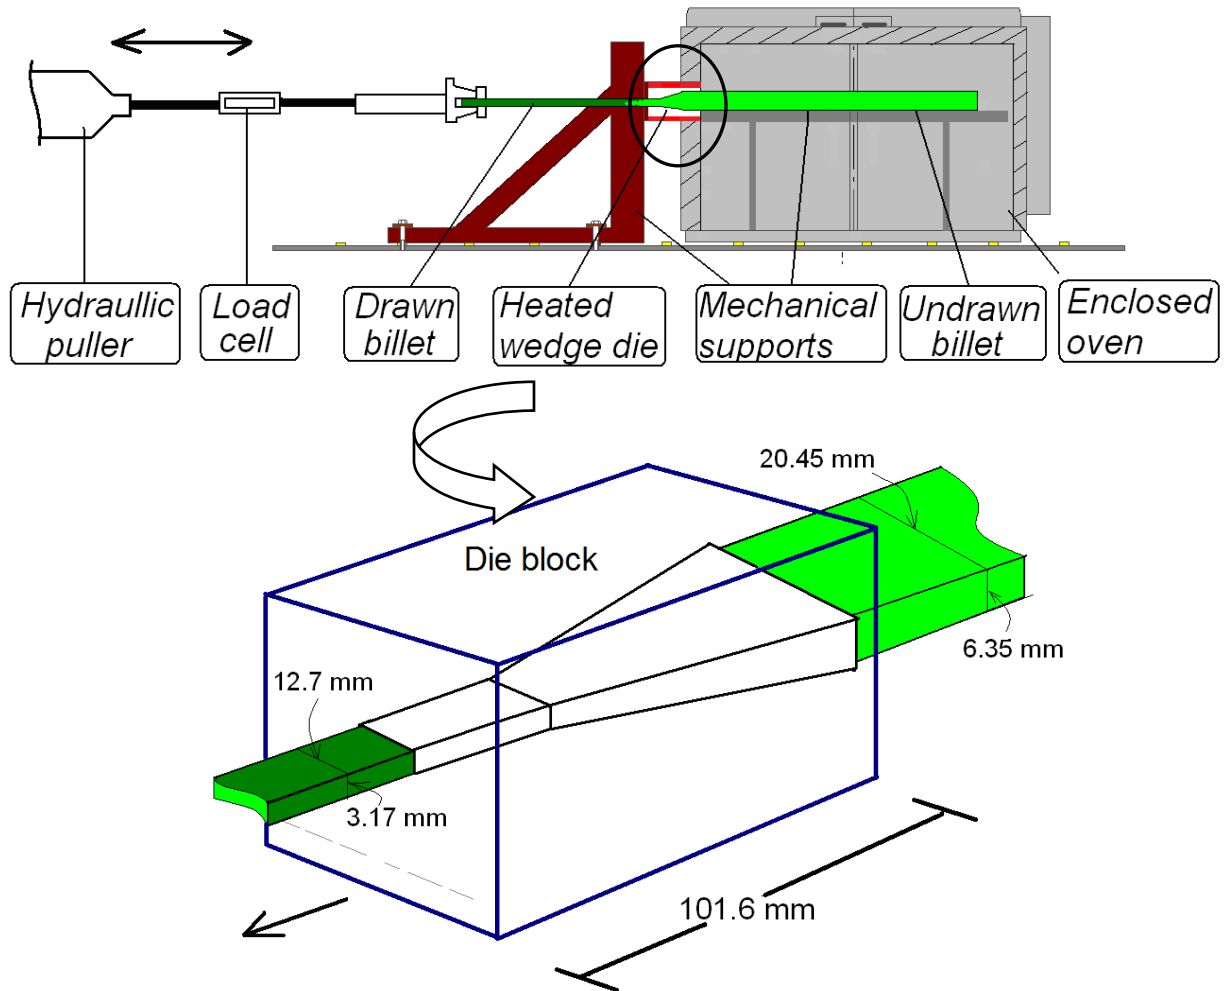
Experimental setup and the wedge die used for lab-scale die drawing runs.
